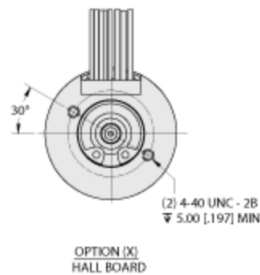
Outline drawing of the gearmotor LRPX32, back view [11]
